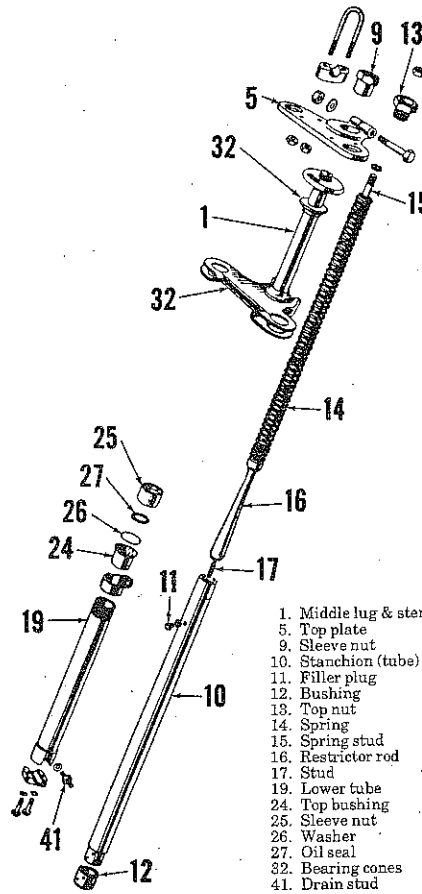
Exploded view of front suspension used on T20 and T20C models. Stem (1) rides on 1/4-in. diameter bearings. Fifteen are used in each race.
